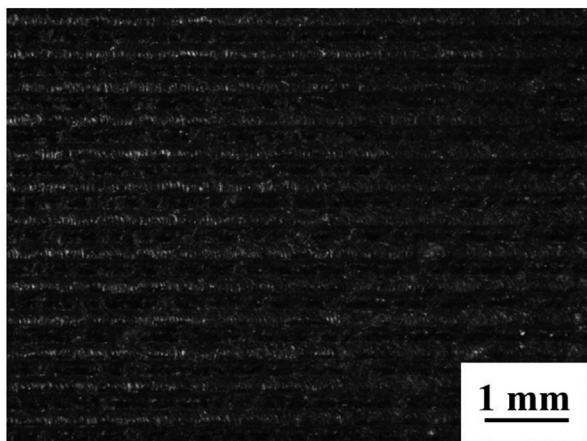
Surface structure of WC-Cu coatings after Laser Remelting [authors].
